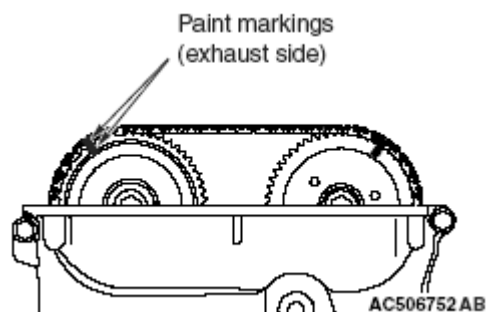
Aligning Exhaust Side Paint Mark Of Timing Chain
